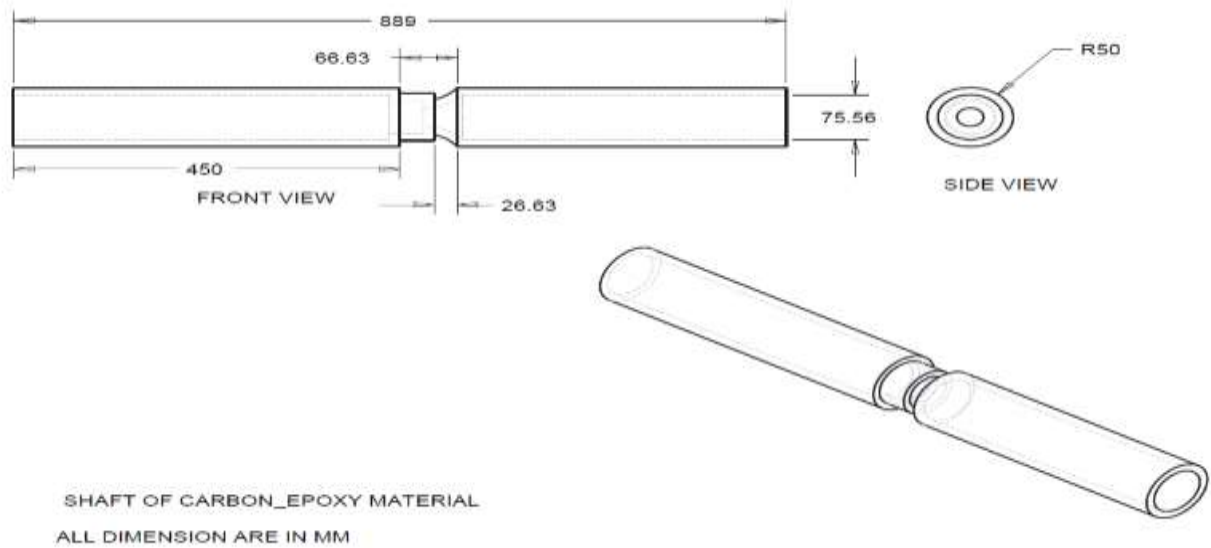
Drafting Model of Propeller Shaft for Carbon Epoxy
